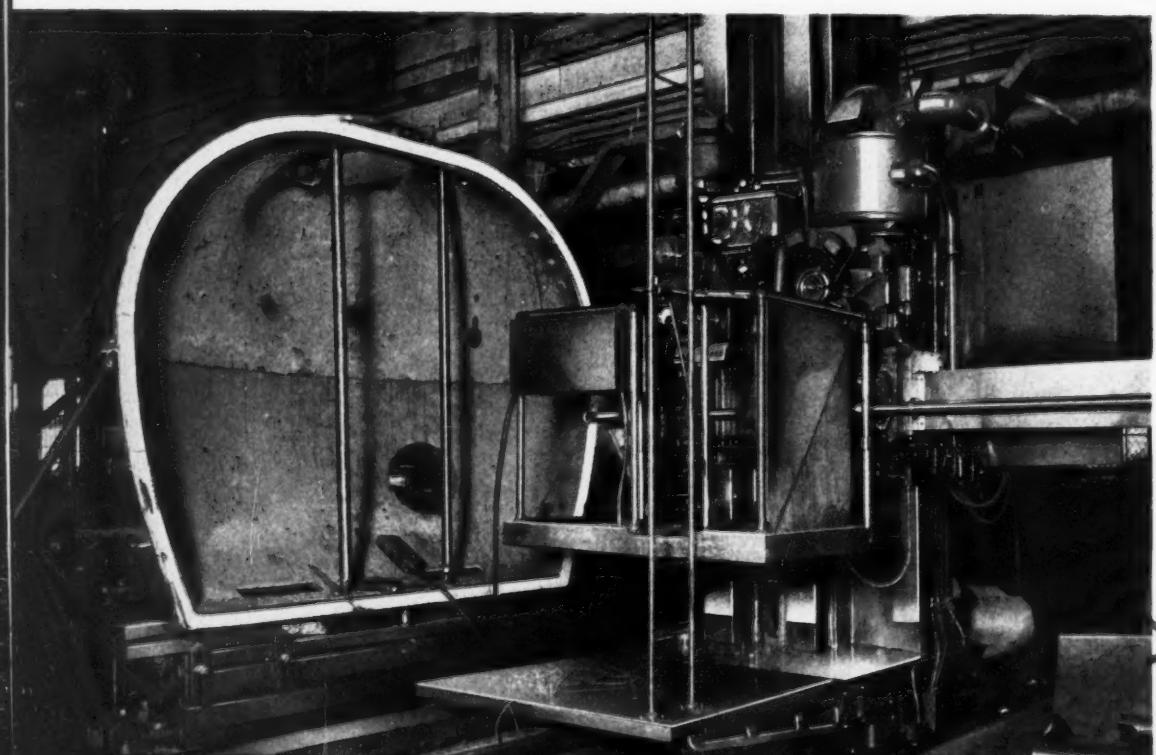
Employing a Draw-cut Shaper for End-milling the Joint Surface of a Large Condenser Head
